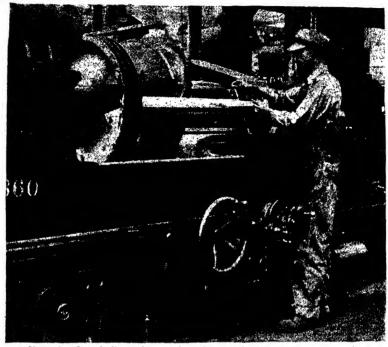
Regrinding a locomotive piston rod with the piston in place.
